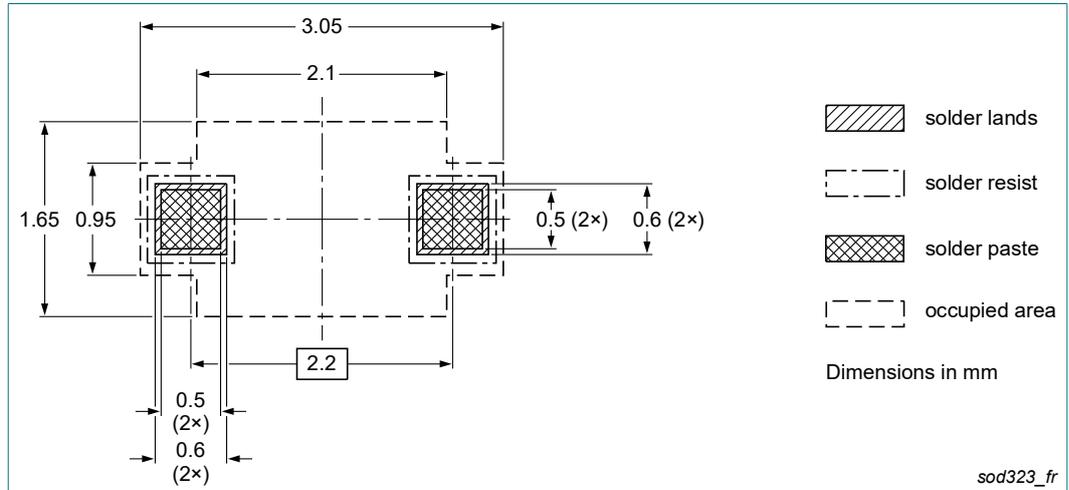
Reflow soldering footprint for SOD323 (SC-76)
